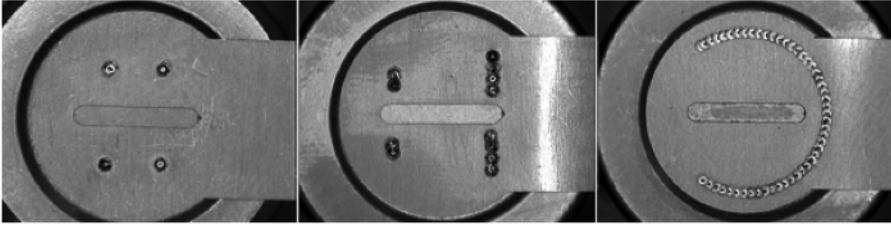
Resistance spot welding of battery and electronic assemblies. (Reproduced from Ref. [37]. Public domain.)
